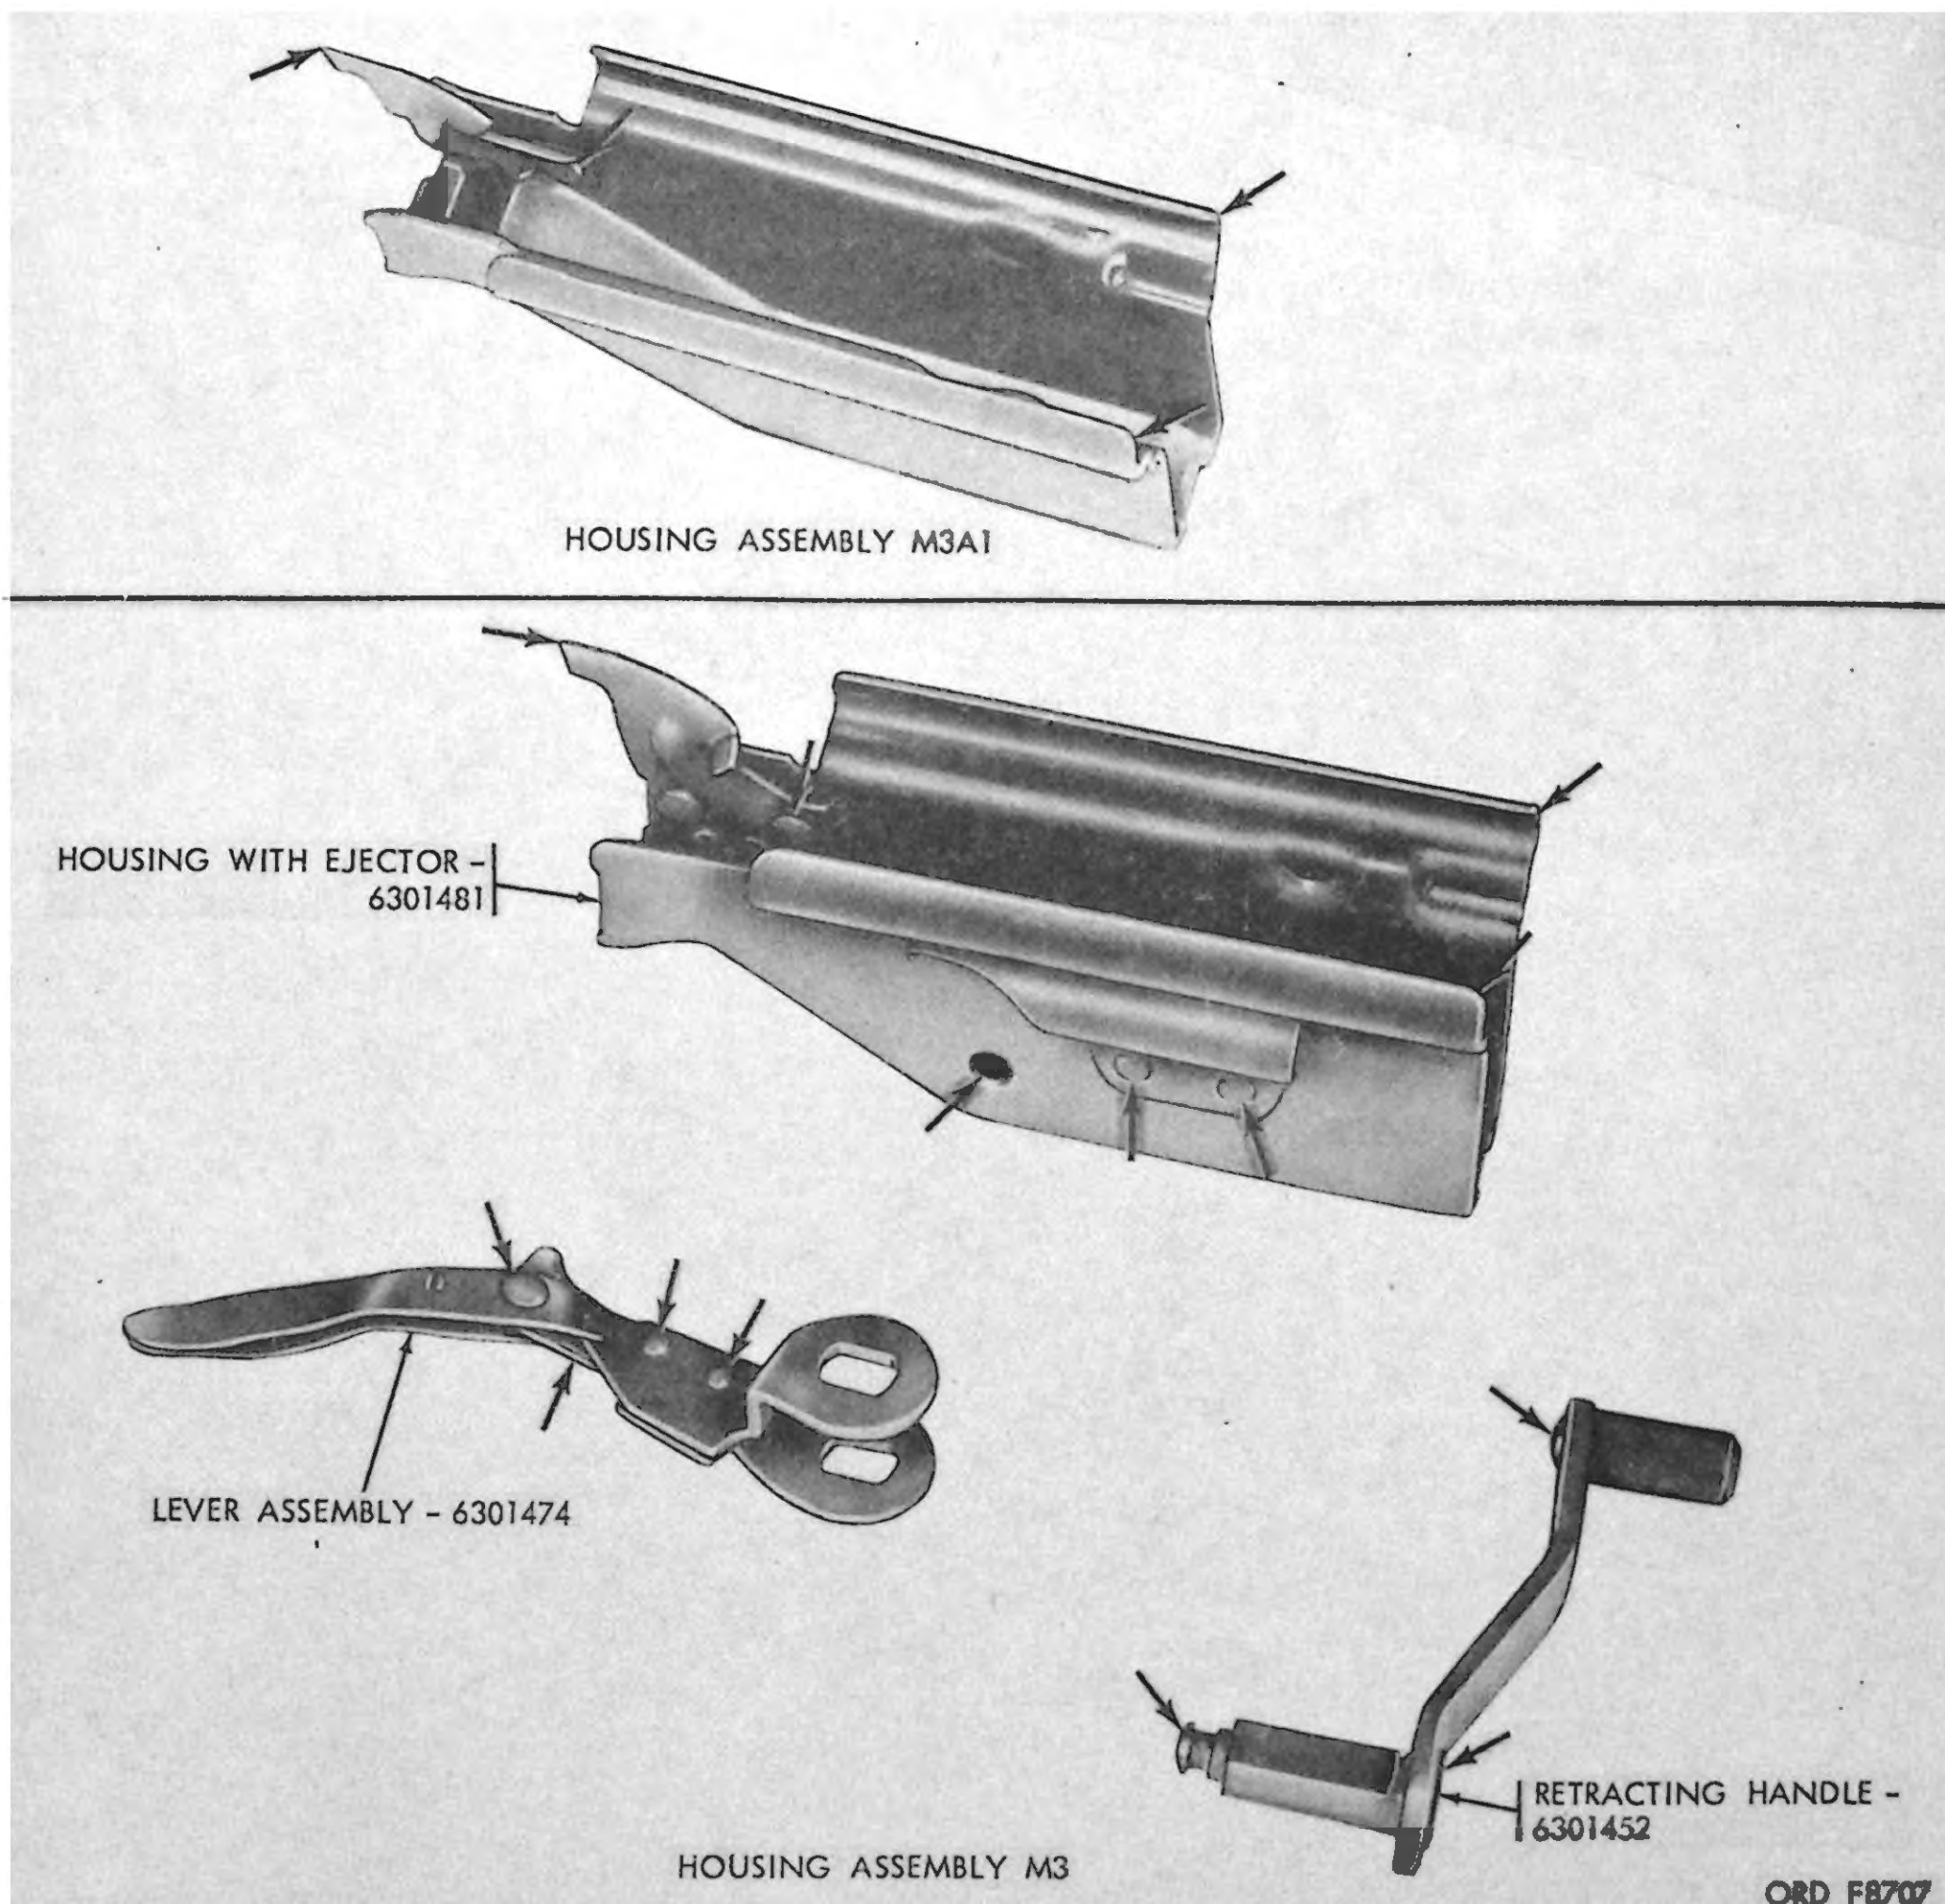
Housing assemblies M3 and M3A1—inspection points.
